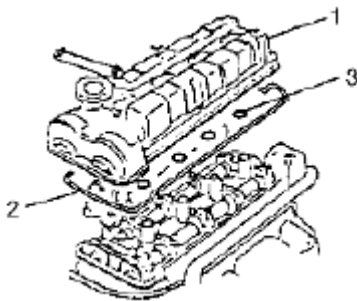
Identifying Cylinder Head Cover Gasket & O-Rings
